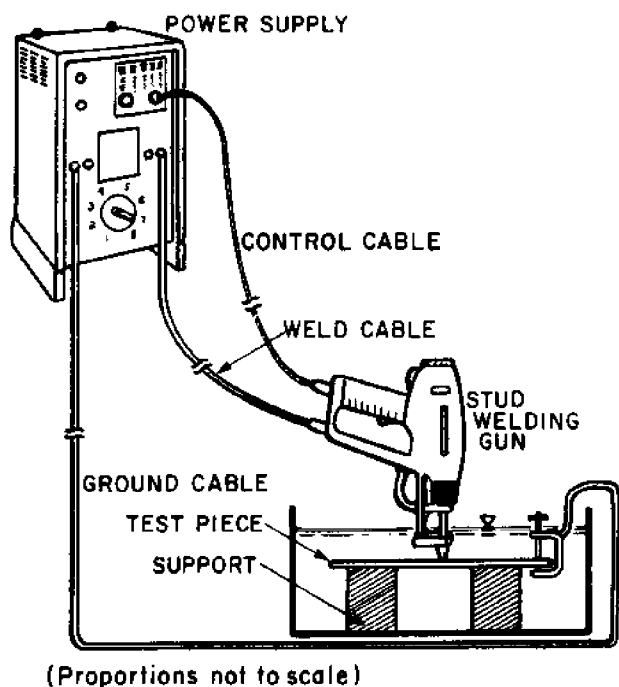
Arc stud welding setup used by Chiba.
